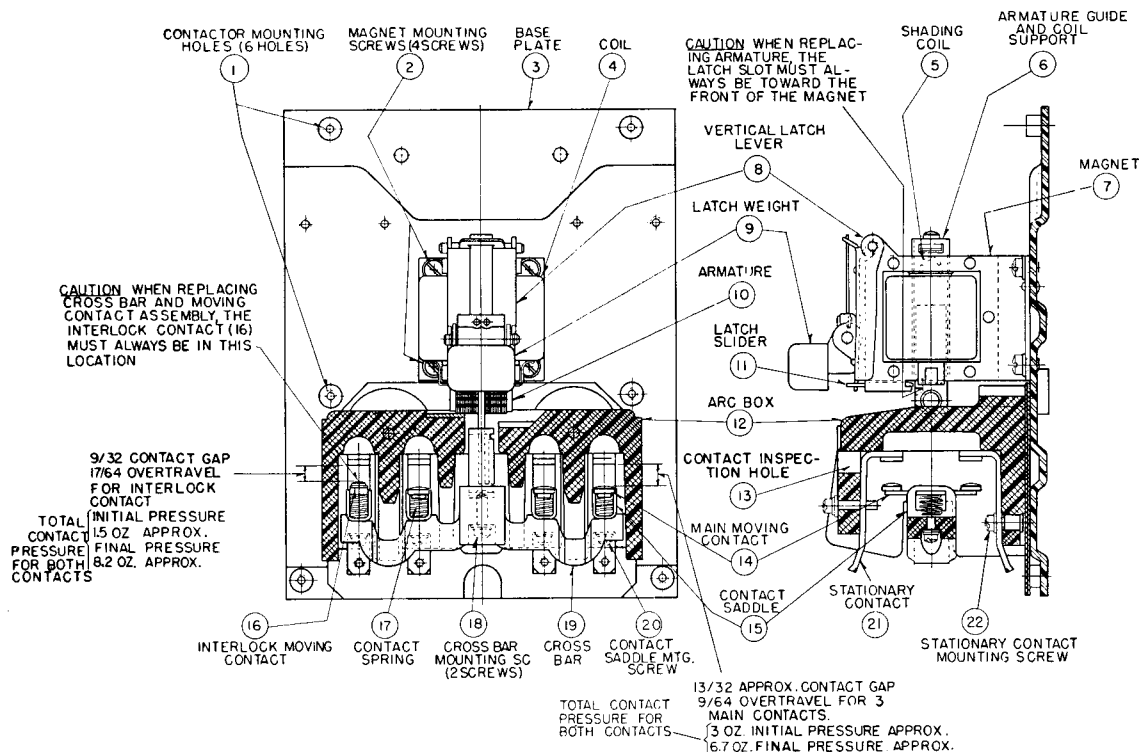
SECTIONAL VIEW OF TYPE IDN CONTACTOR
